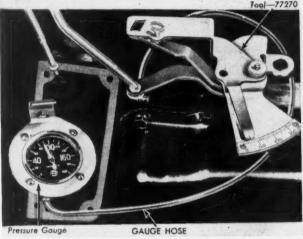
Pressure gage attached to the transmission with the protractor showing pressure rise point.
